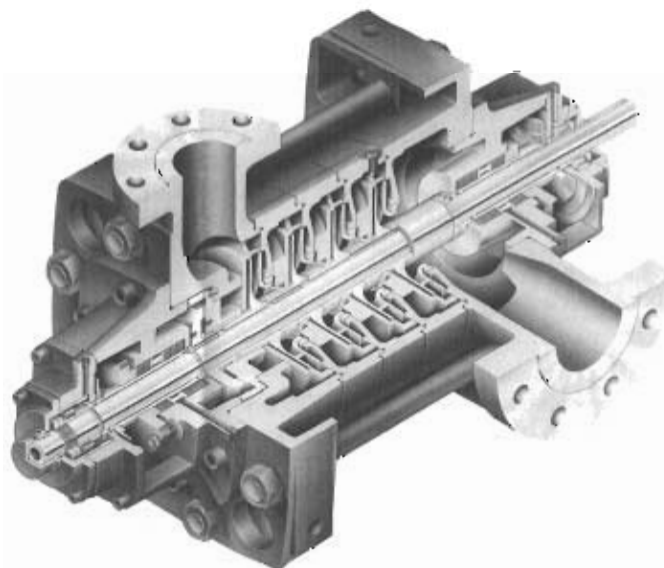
Large 4-stage segmental pump with balance drum, sleeve bearings and tilting pad thrust bearing
